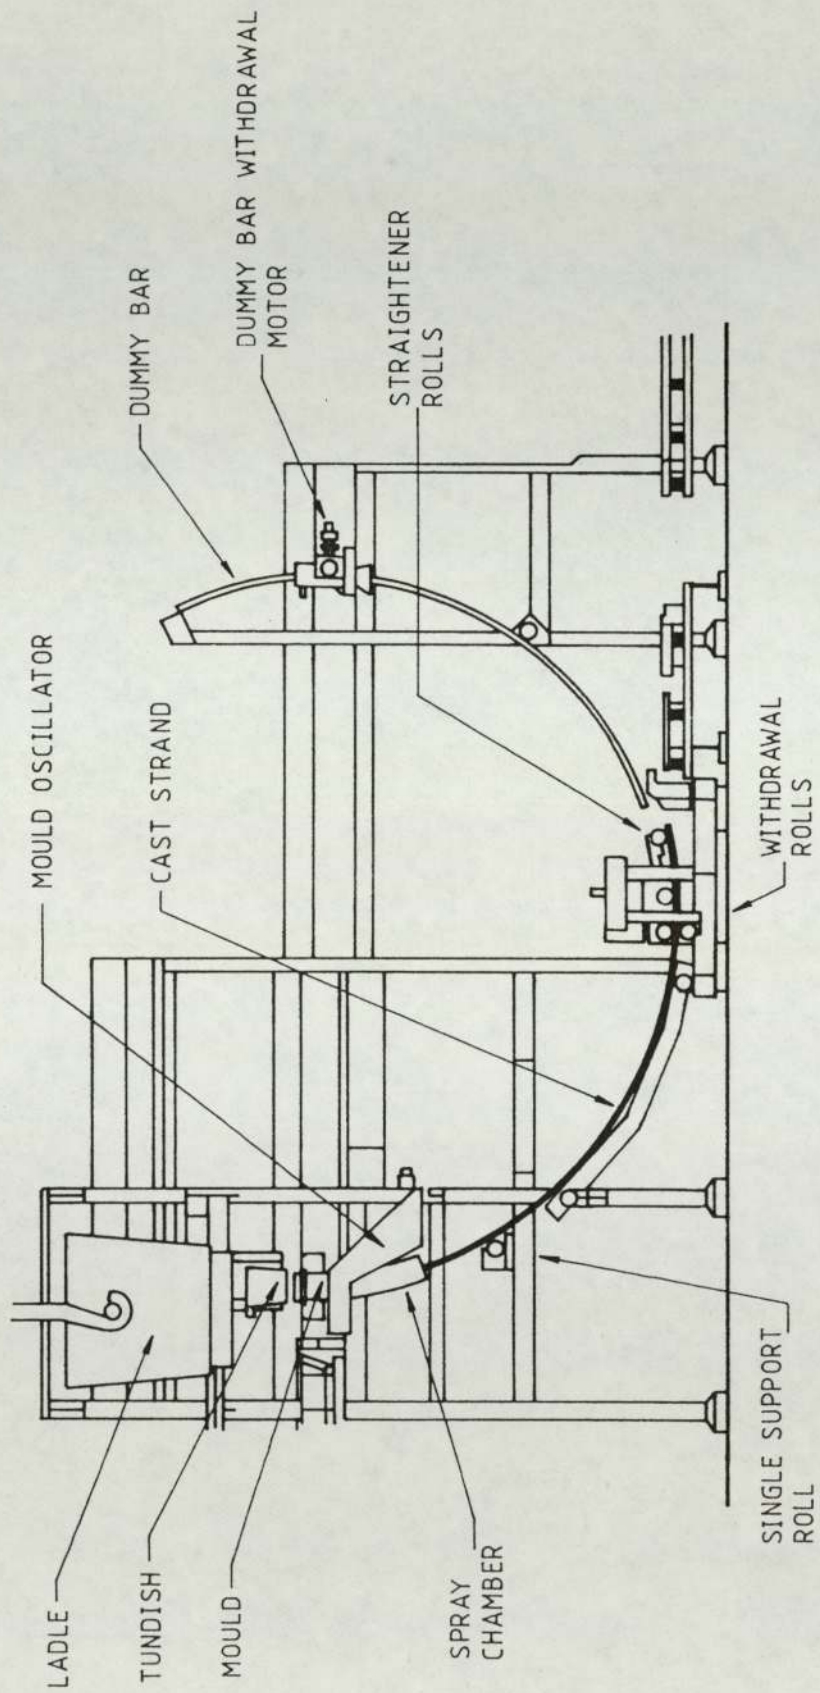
'ROKOP' DESIGN BILLET CONTINUOUS CASTING MACHINE.
